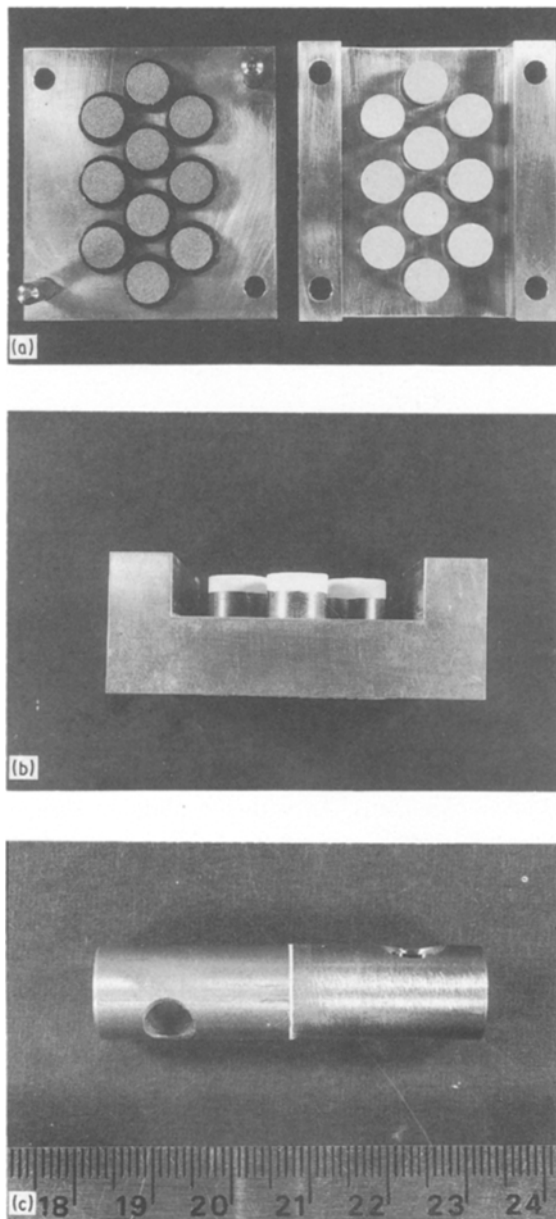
Assembly of the tensile specimen using a multiple aligning jig: (a) coated specimen halves with the mating, uncoated halves; (b) side view of the coated halves, with Teflon tape up to the coating surface; (c) the assembled specimen.
